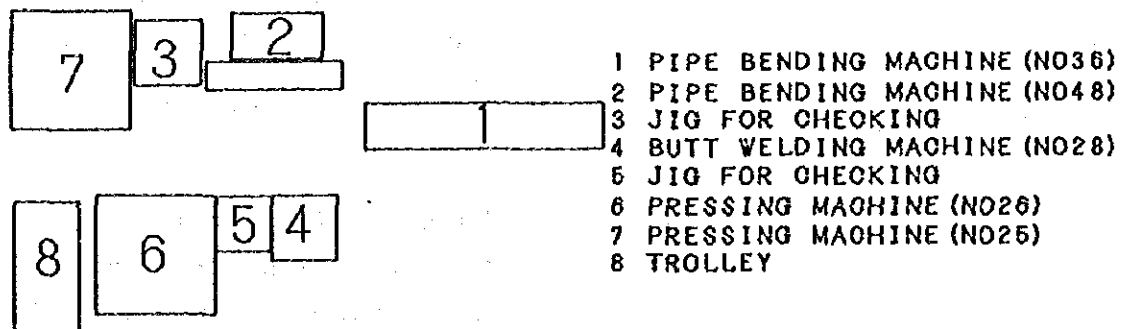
Planned Layout of Pipe Working Processes for Passenger Car Seats.
